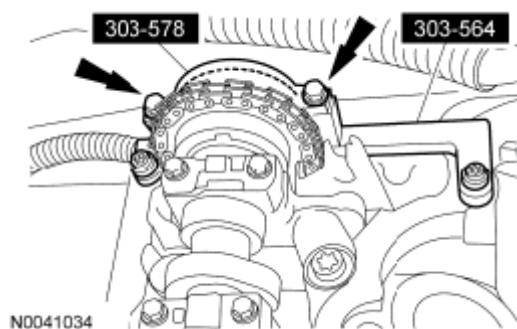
Identifying Camshaft Sprocket Holding Tool And Adapter (303 - 564)
